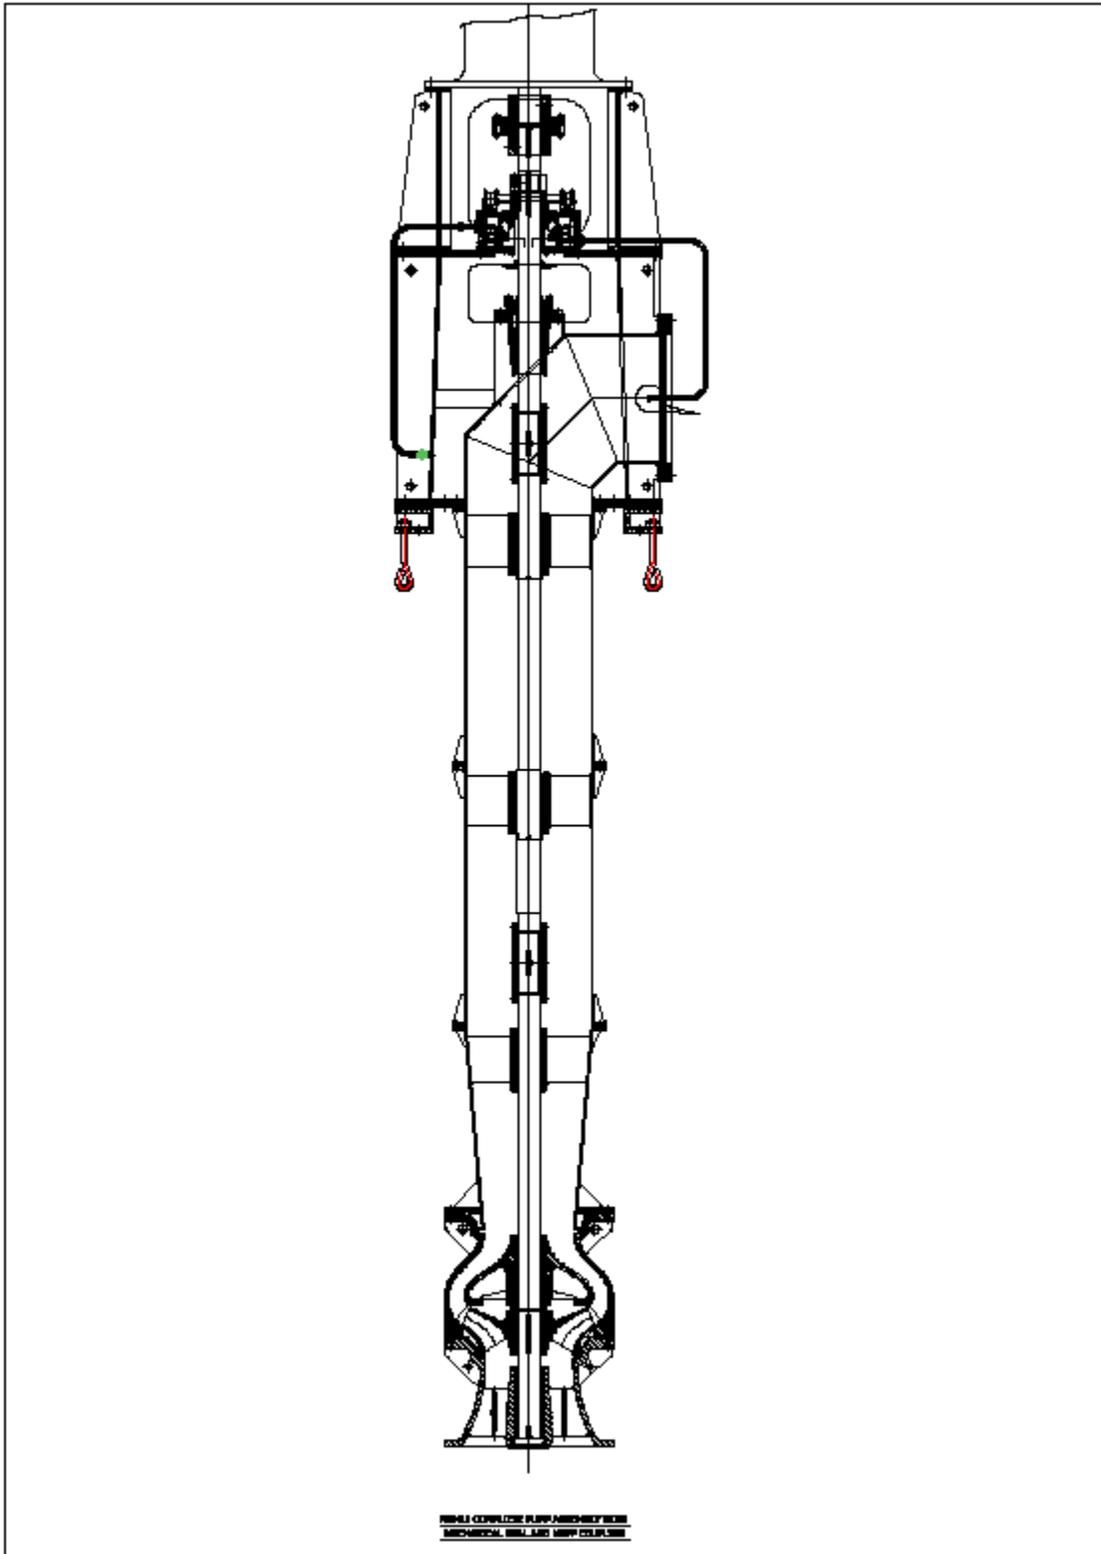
CONCRETE PUMP AUGERING COLUMN (1/2)
